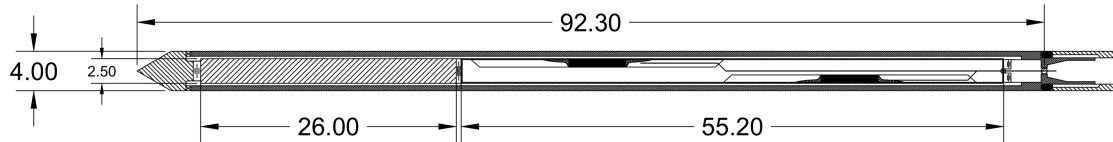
Design 1: 4 mm ϕ (Dimensions in [mm])
